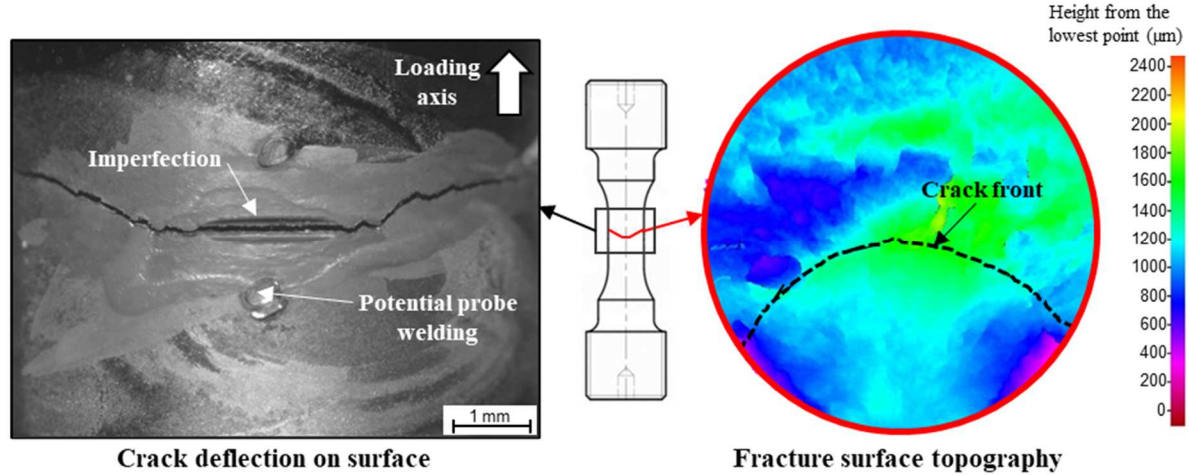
Illustration of the crack deflection occurring on 18MND5 steel specimens - Crack deflection at the specimen surface (on the left) ; Topographic analysis by optical microscopy of the fracture surface (on the right)
